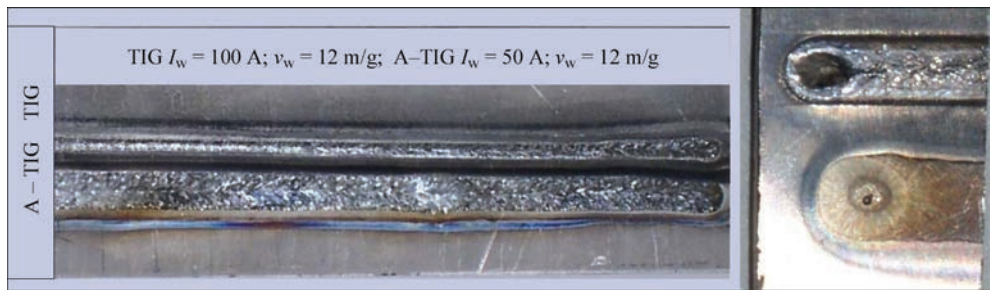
Appearance of weld surface at a full penetration, produced by TIG and A-TIG welding of VT-20 titanium alloy of $\delta = 2$ mm thick at the same speed of welding of 200 mm/min: above — A-TIG, welding current is 50 A; below is TIG weld, welding current is 100 A (results of personal investigations)
